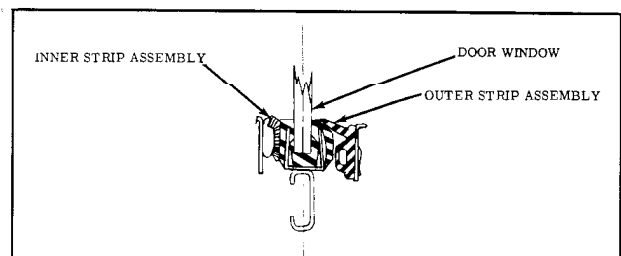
Glass Run Channel Inner and Outer Strip Assemblies
